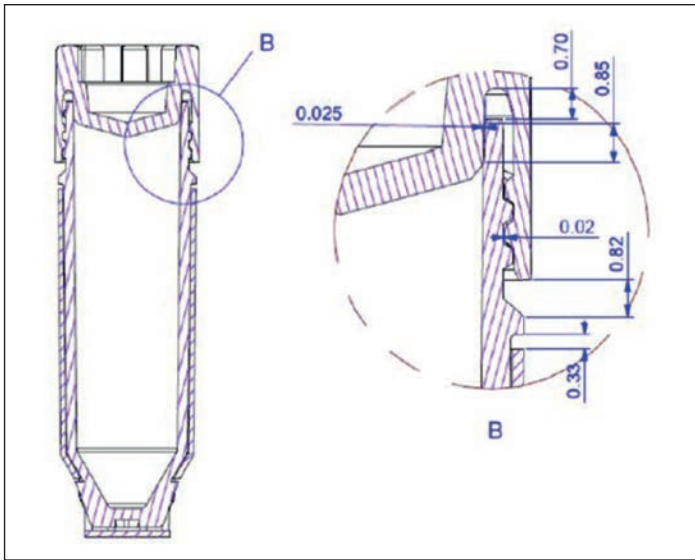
Schematic of the compression sealing design of an externally threaded tube with tolerances in millimetres.
